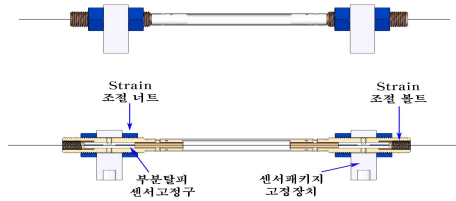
Optical fiber sensor packages with stripped fiber fixture.
